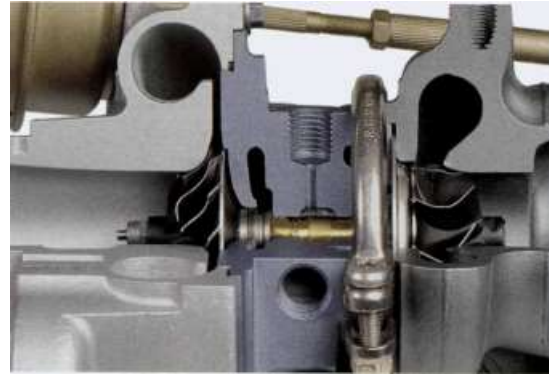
Semi-floating ring fluid bearing-rotor system, taken from [63]
